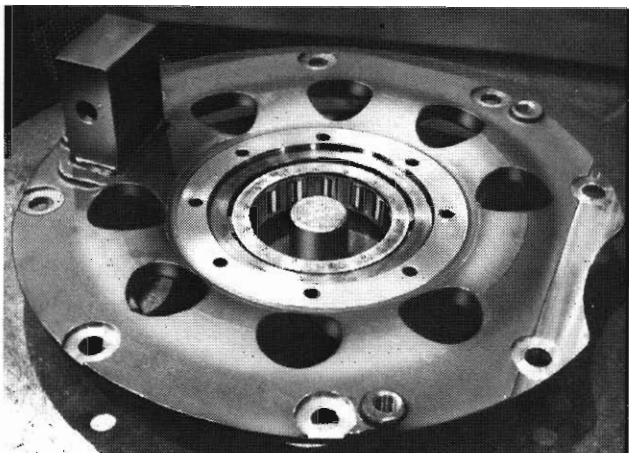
Bearing Pressed Into Pinion End Bearing Housing 23322
